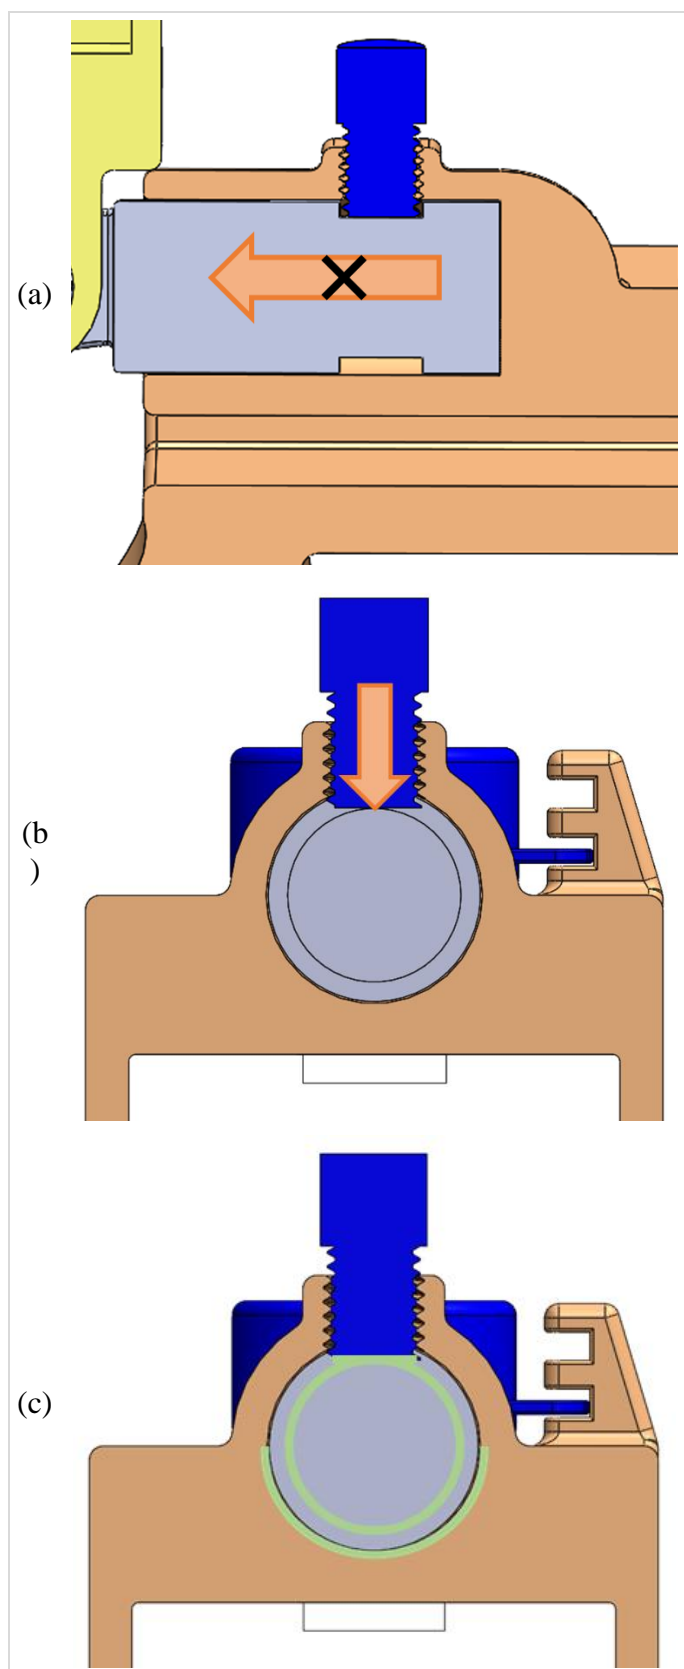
Different Views of the Locking Mechanism. a – Right View Cut; b – Front View cut; c- Front View Cut with Green Marks
